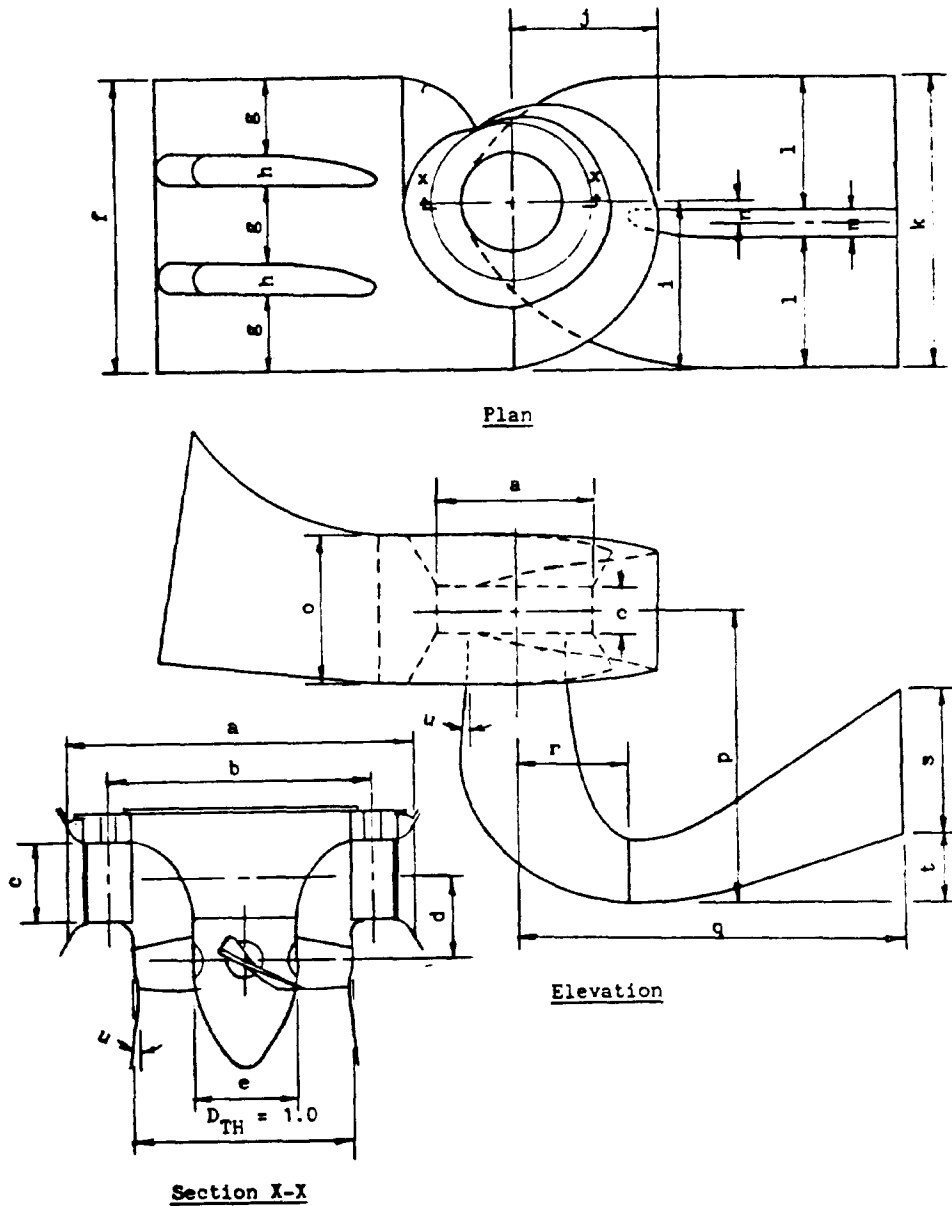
PROPELLER TYPE TURBINES - DIMENSIONS
